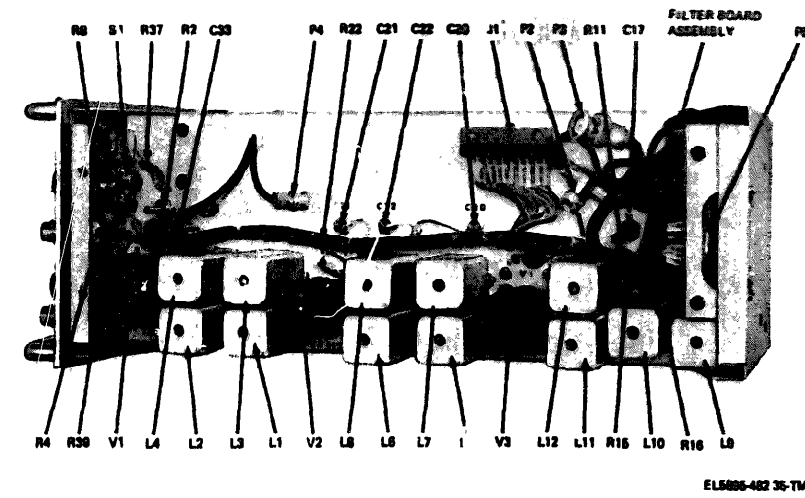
653B modulator with modulator assembly removed, bottom view, parts location
